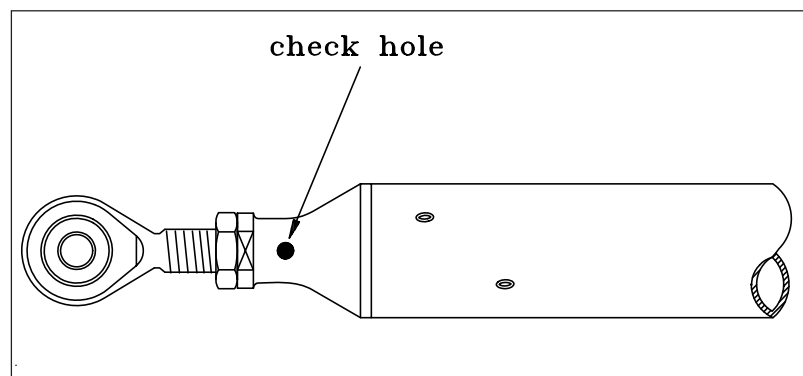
, Sheet 1 Aluminium Control Rod Check Hole
